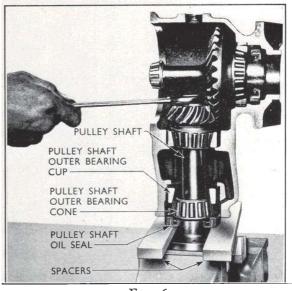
Housing Cut-away to show Installation of Oil Seal when Replacing Pulley Shaft
